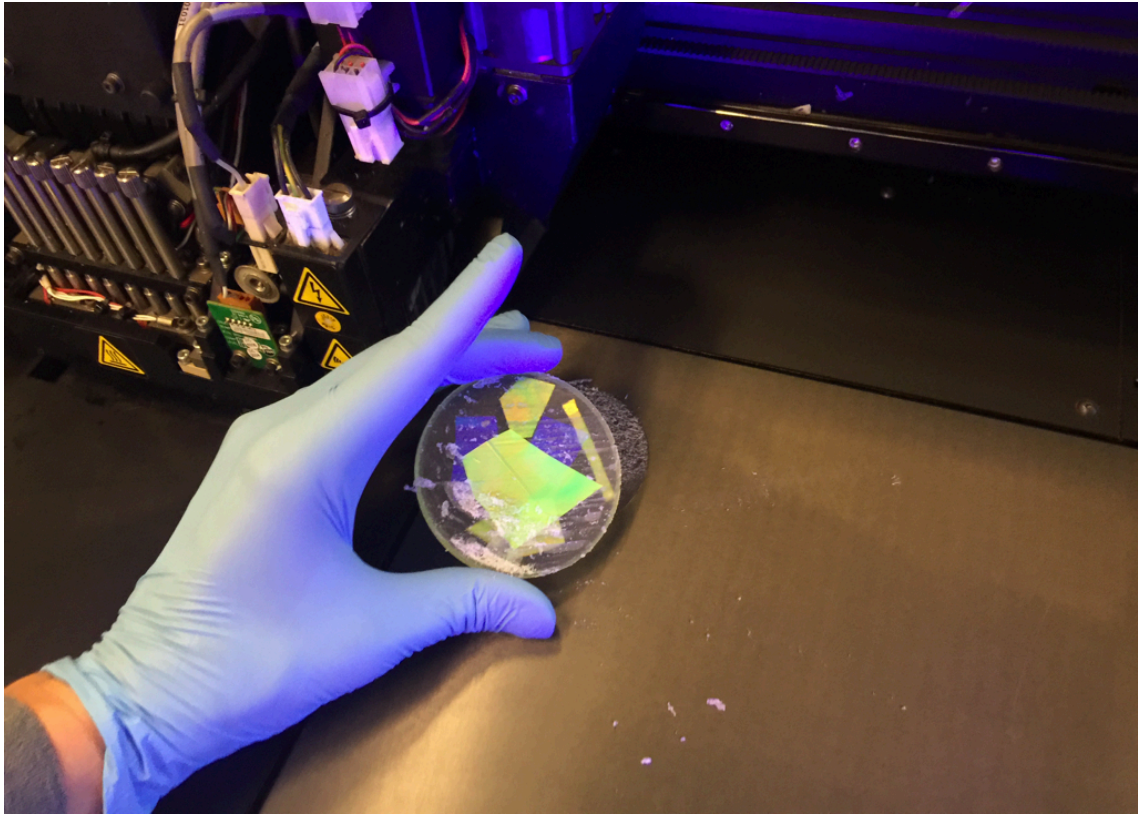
Strips of Mylar film cut into uneven sizes used as in-layer in between print slices of circular disc, during 3D printing process on Objet Connex500 3D printer.
